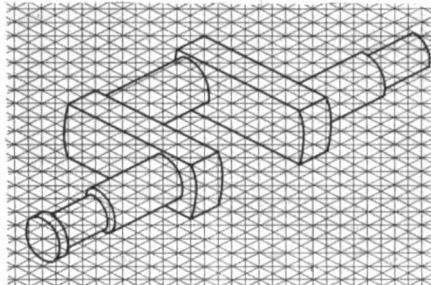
Isometric sketching paper to enable a draftsman to make drawings in isometric perspective
